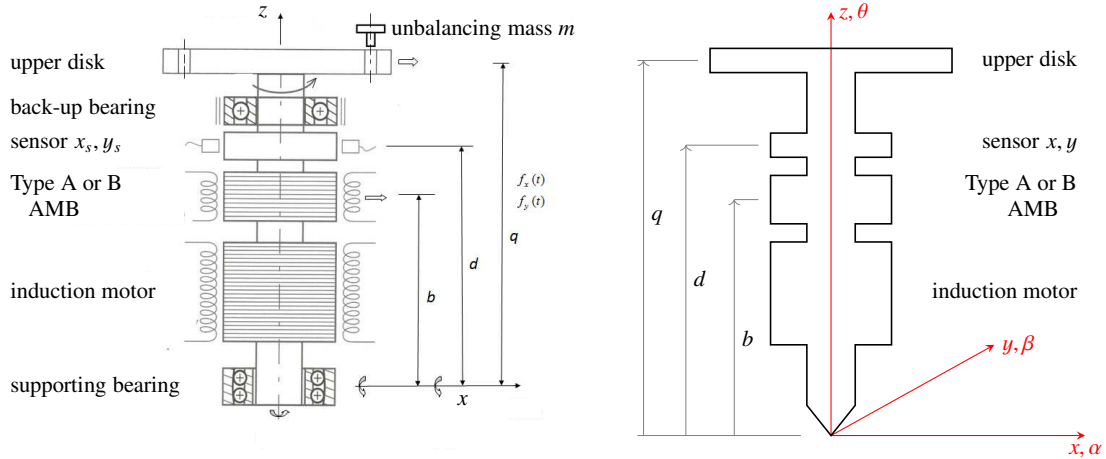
Vertical rotor's aspects and dimensions, in the left part. In the right half, a simplified representation of its basic geometric aspects and dimensions.
